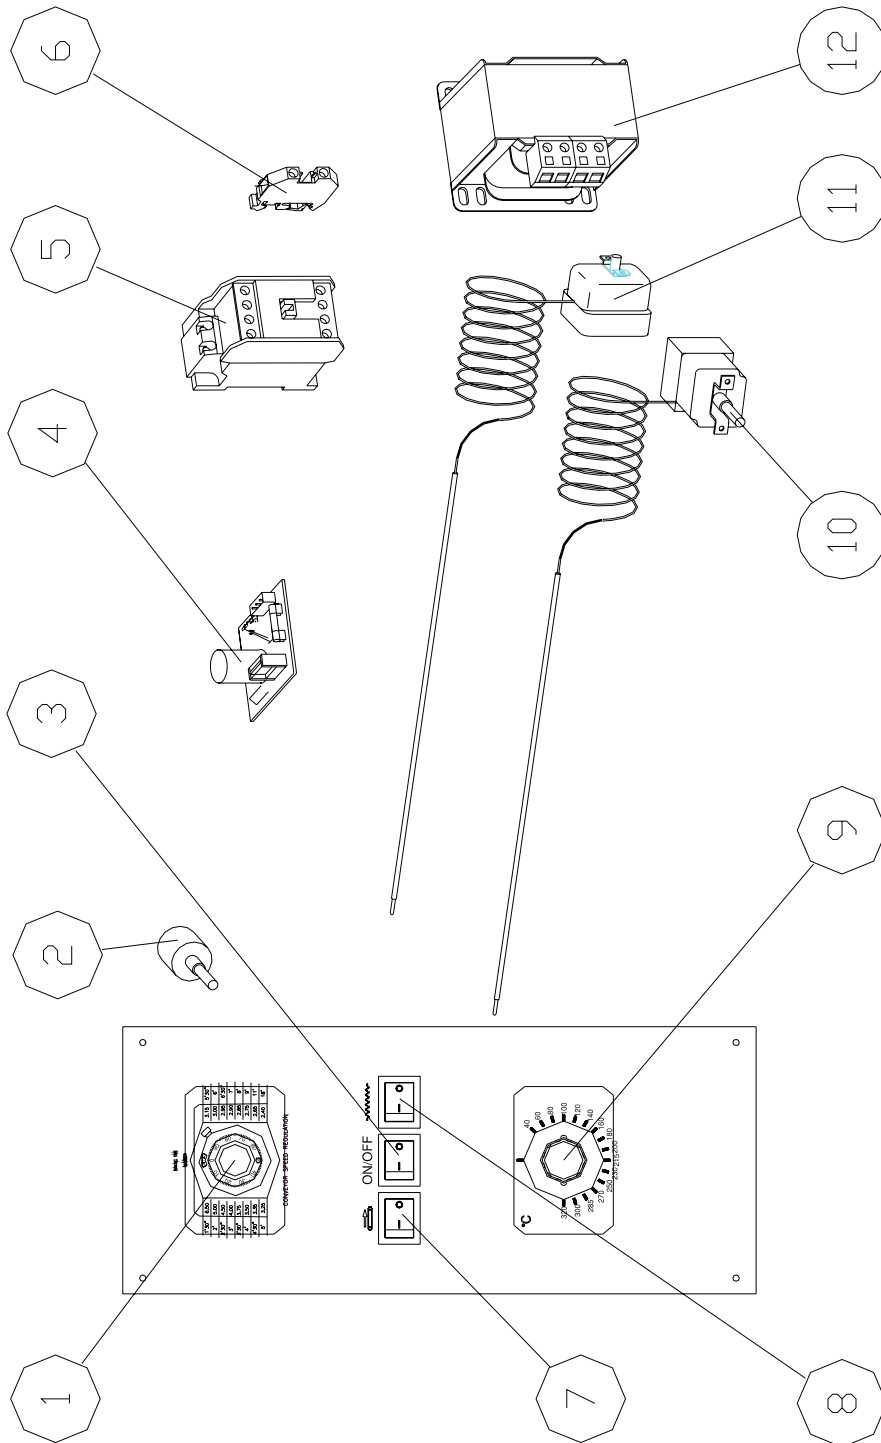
Electrical parts exploded view DPZ3030E version electromechanical
